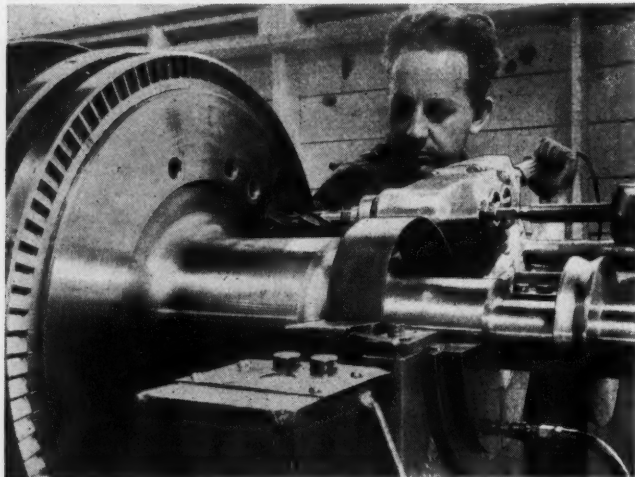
The Exact Amount of Metal that should Be Removed to Balance the Shaft is Removed by Drilling with the Equipment Shown Here
